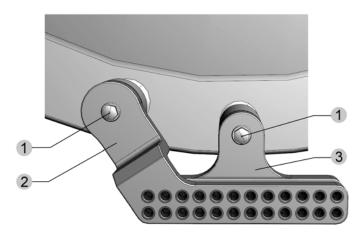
Capsule holder installed at position 1 / position 7 (capsule feeder row 1)
